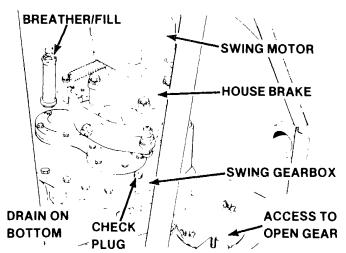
Turntable Ring Gear Access Hole and Swing Mechanism
